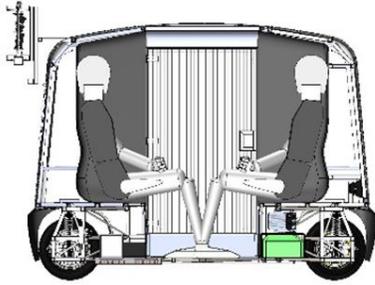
Version 2 Vehicle Welded Frame and Hub Wheel Testing
